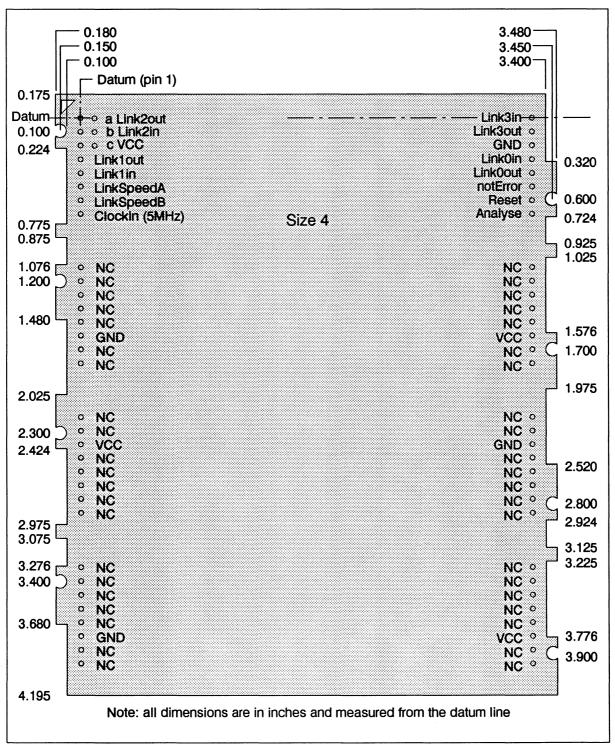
IMS B430 outline drawing (All dimensions in inches)
